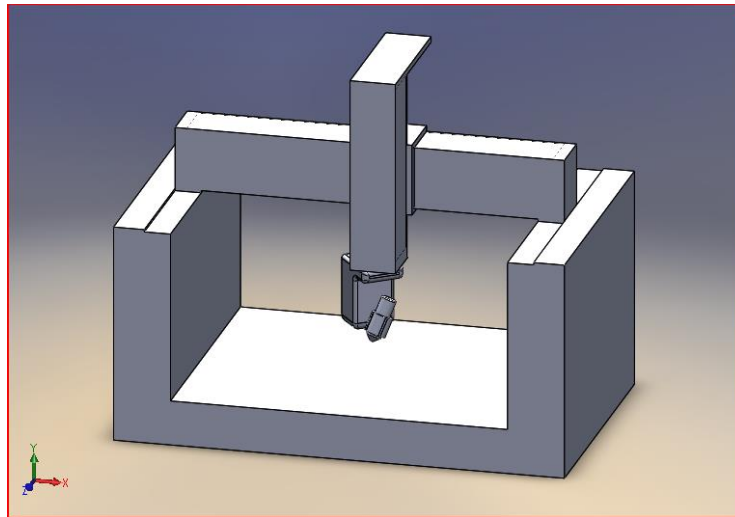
Five-axis CNC machine tool in SolidWorks
